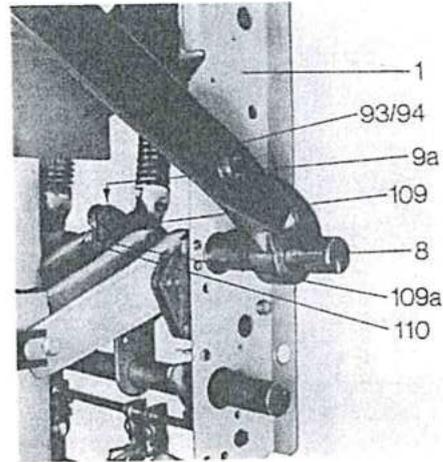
A: Toggle joints of snap action mechanism in over-centre position, latch of closing springs broken, closure initiated.
